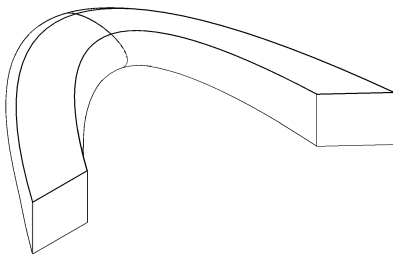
Loft solid with the Close surface or solid check box cleared
